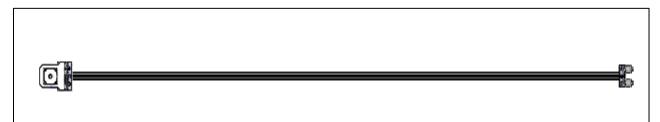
Model of a primary gantry arm complete with motor mounting housing and idler assembly.
